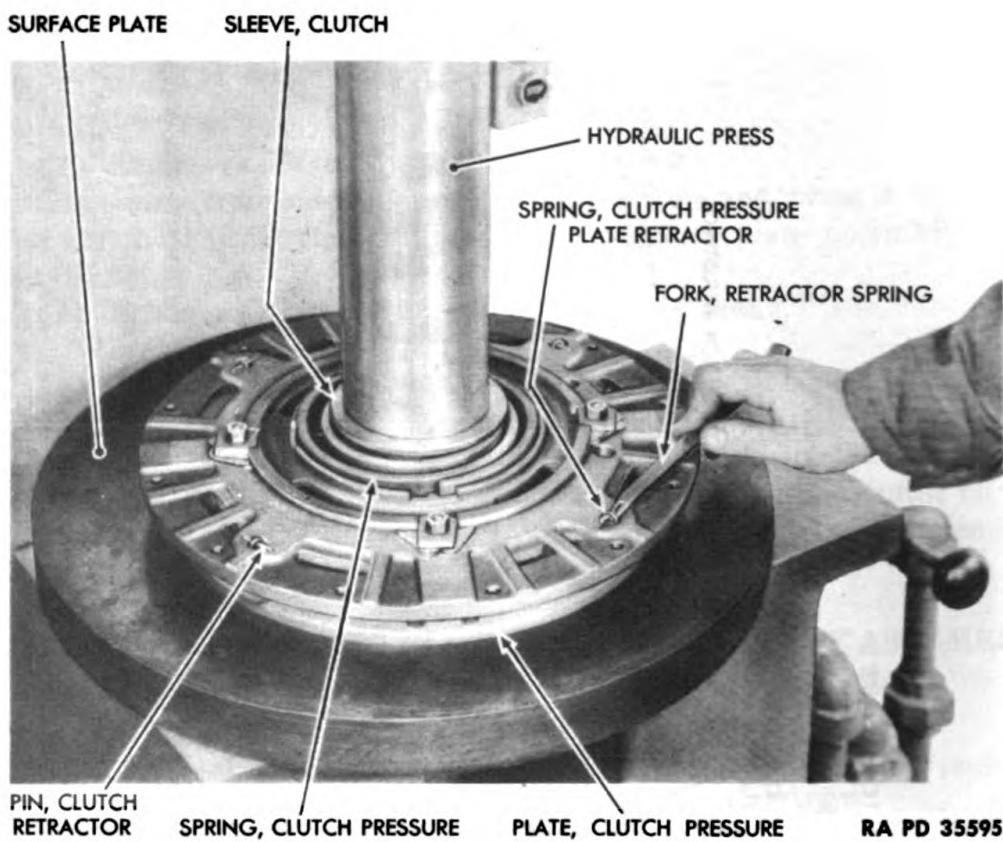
Removing Clutch Pressure Plate Retractor Spring Pin
